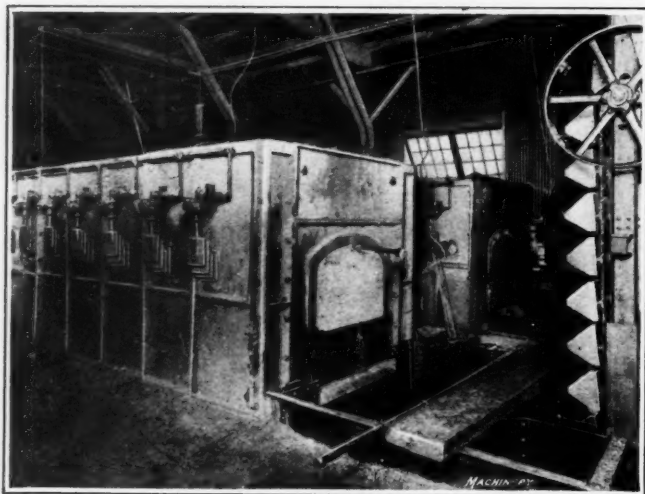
Discharge End of Hardening Furnaces. Hot Shells pushed out into Oil Quenching Tank and carried by Conveyor to Drain Tables, then fed into Tempering Furnaces
